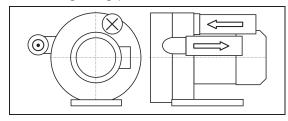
2BH1810 (two-impeller pump-motor unit with a two-stage design)
